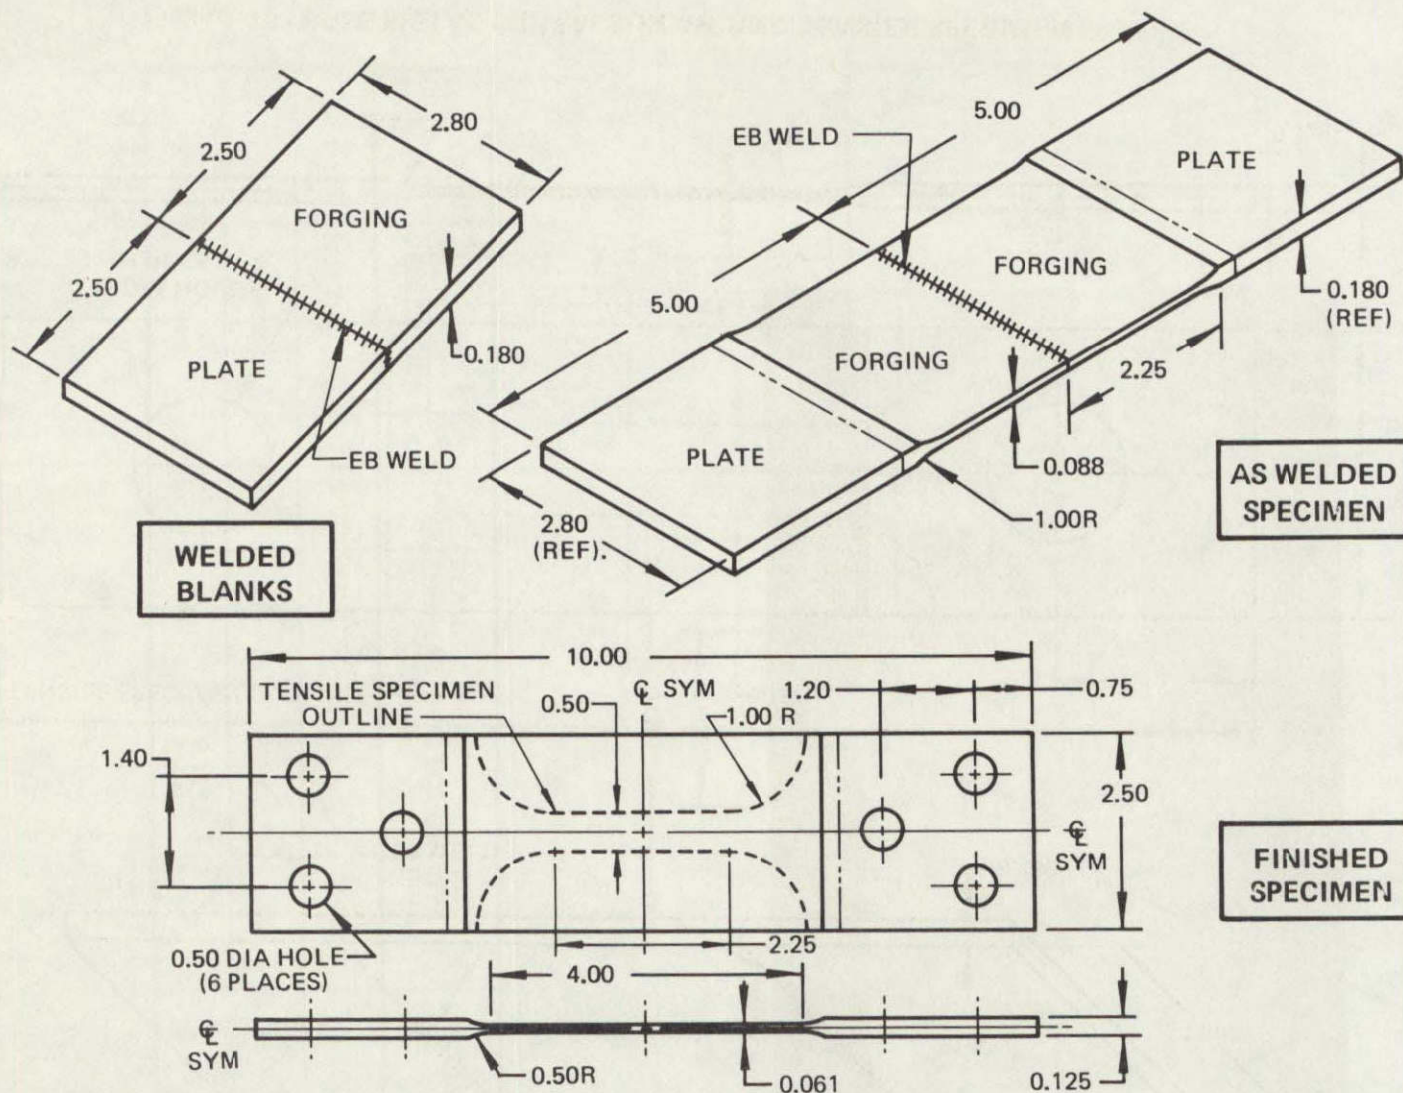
WELD METAL (HAZ) SURFACE FLAW AND TENSILE SPECIMEN
